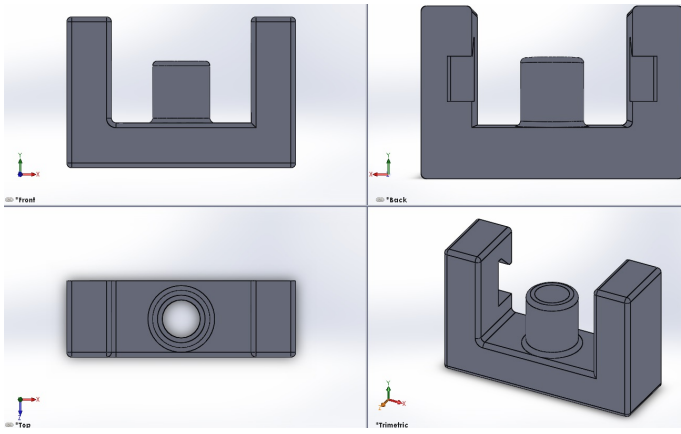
Arm piece structure design to attach a drawing pen on Cozmo.
